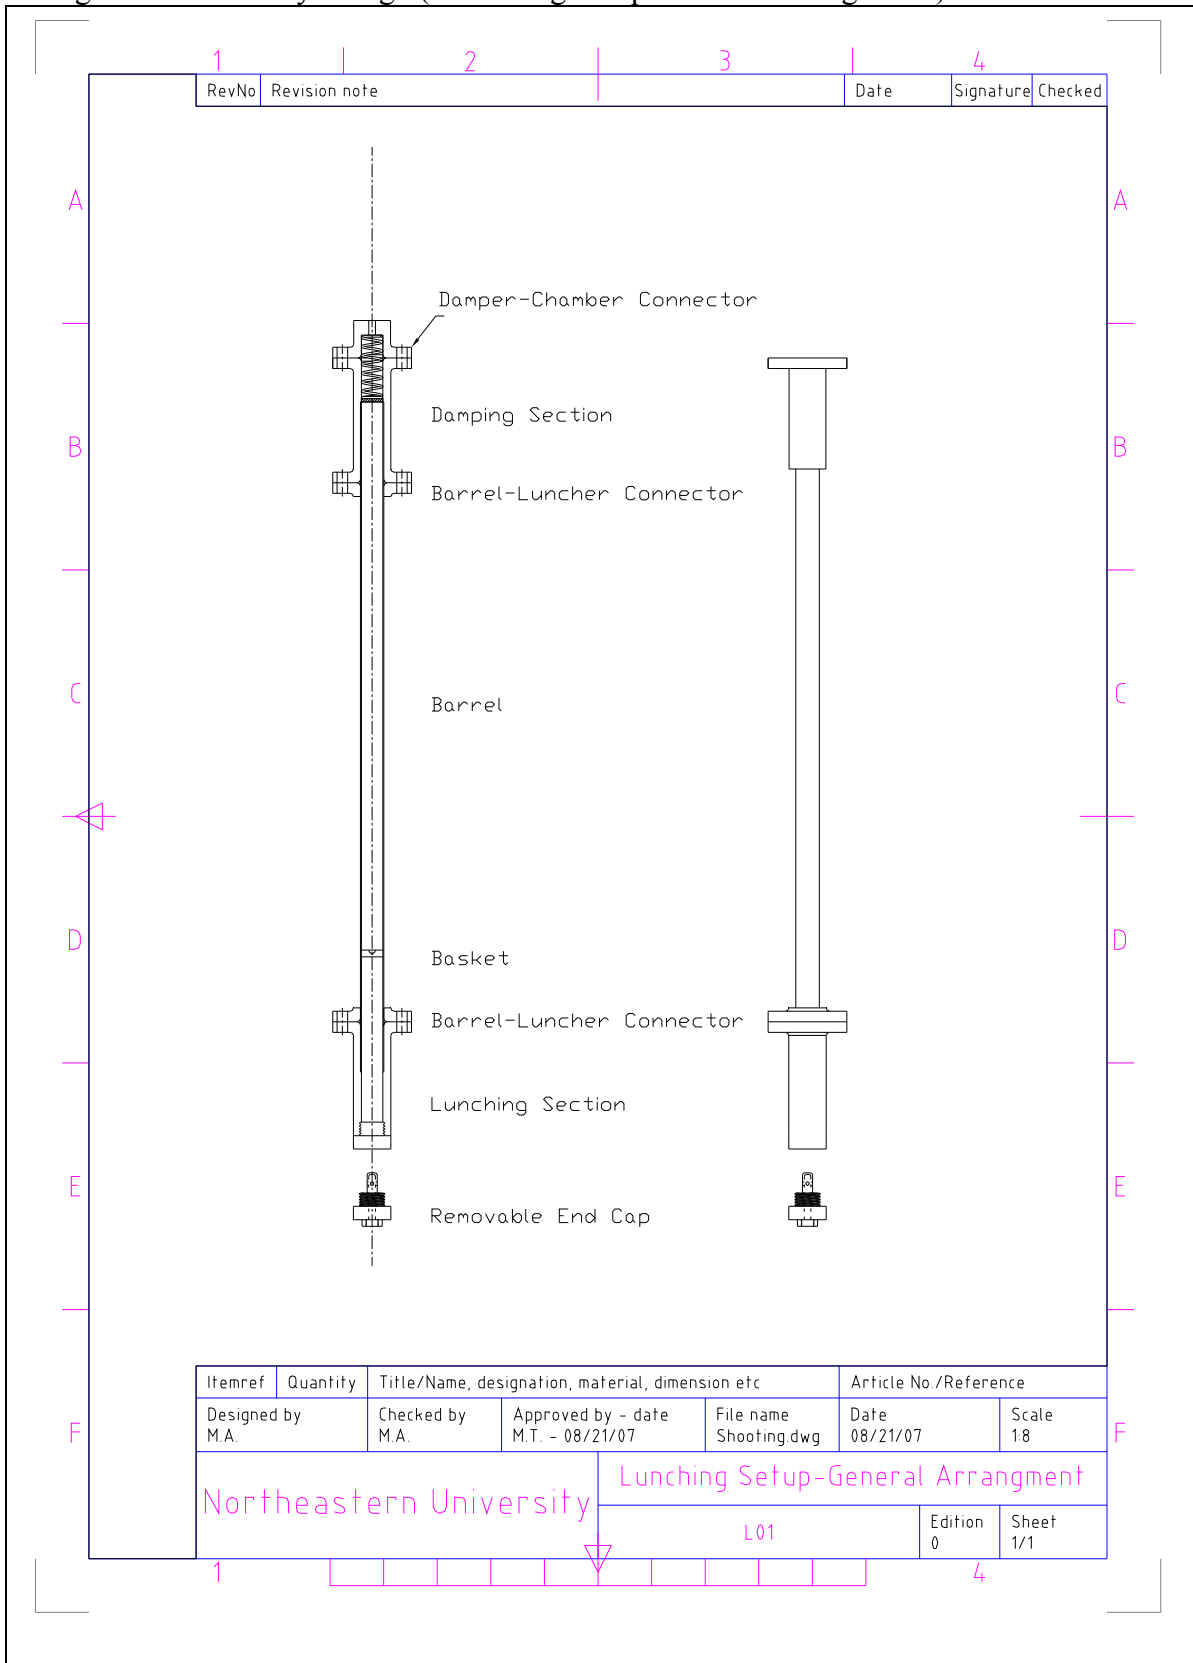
Viscous Driven Accelerator (Launcher Section)
